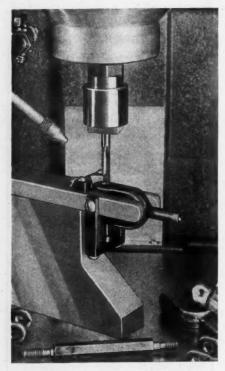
An effective set-up for high speed tapping is a steel brace yoke for an aircraft assembly. The material is hot rolled SAE 4130 steel, and the tap is ¾-inch, 20-thread, two-flute. The fixture is designed to compensate for irregularities in the workpieces. Lard oil is fed to the work by a pump within the housing of the machine.
